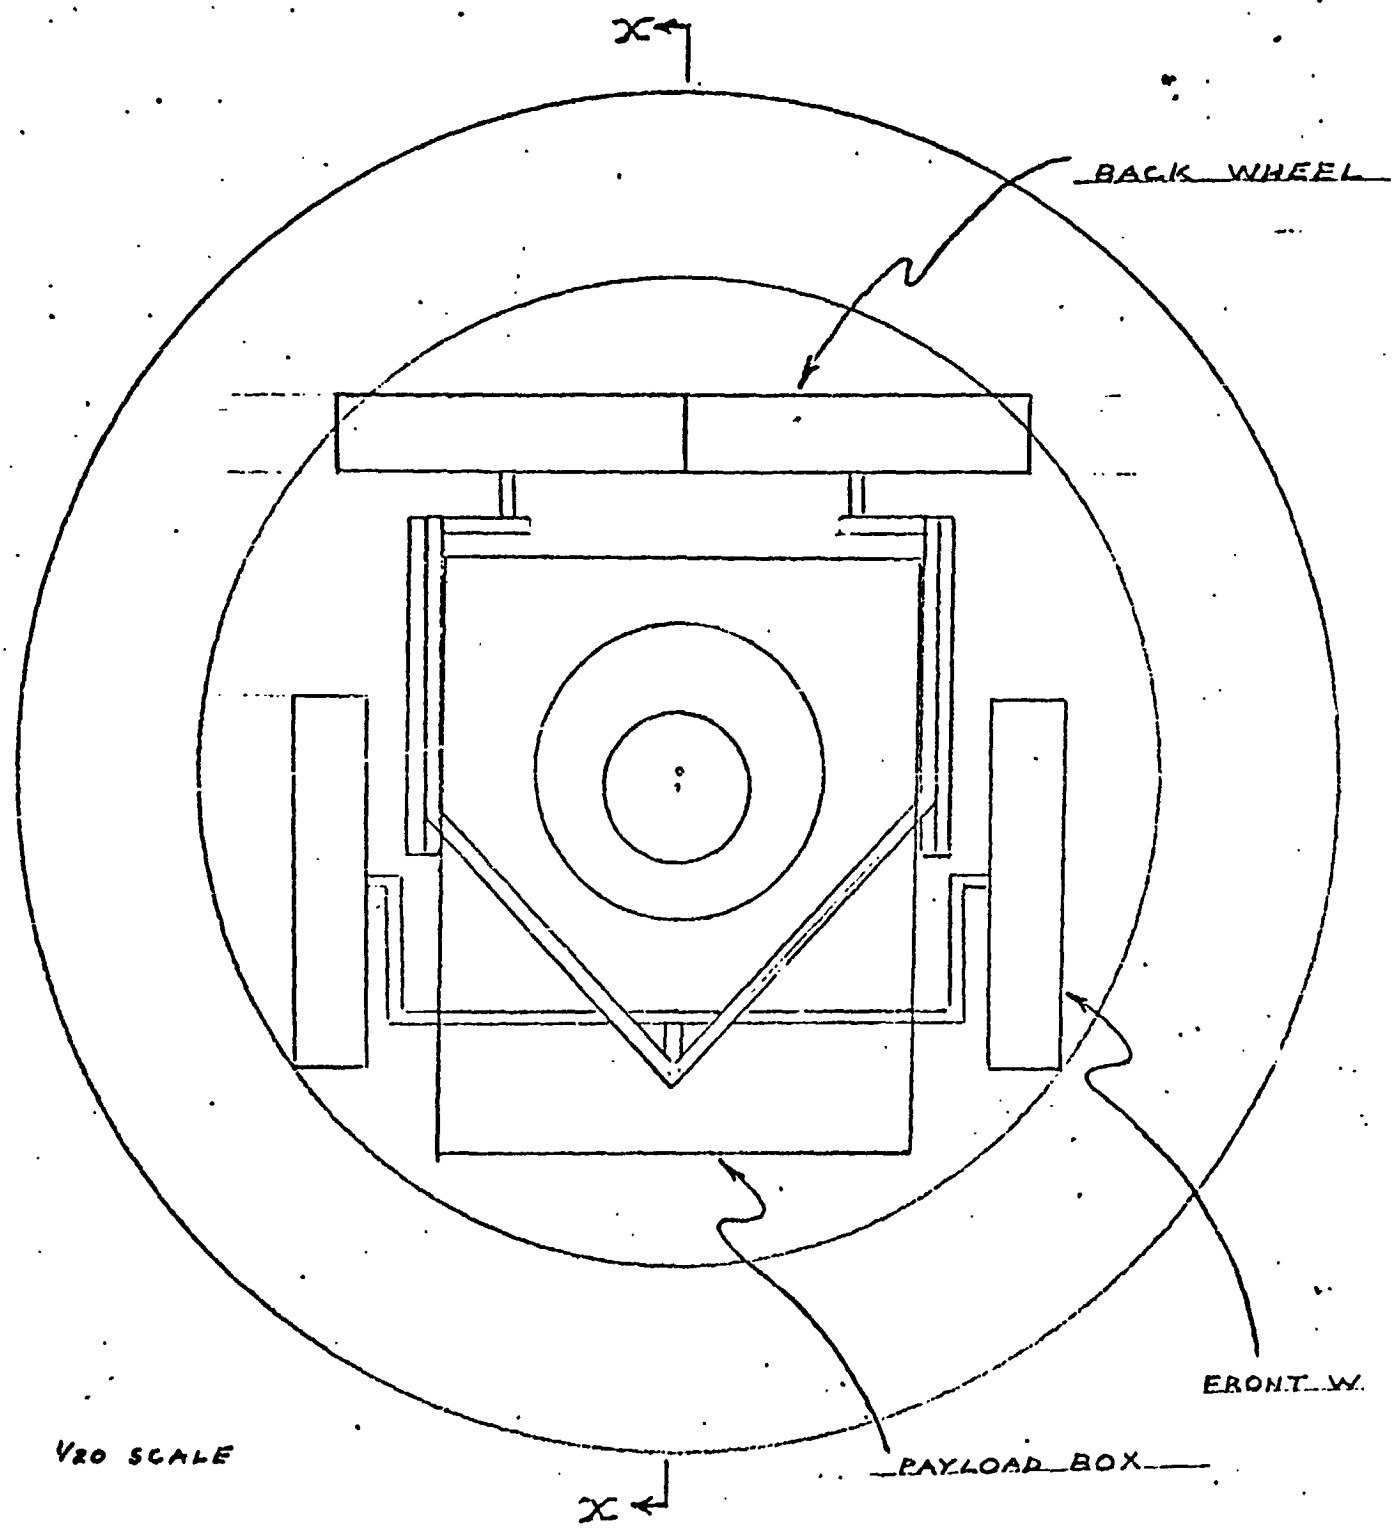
FOLDED VEHICLE IN Viking Capsule
